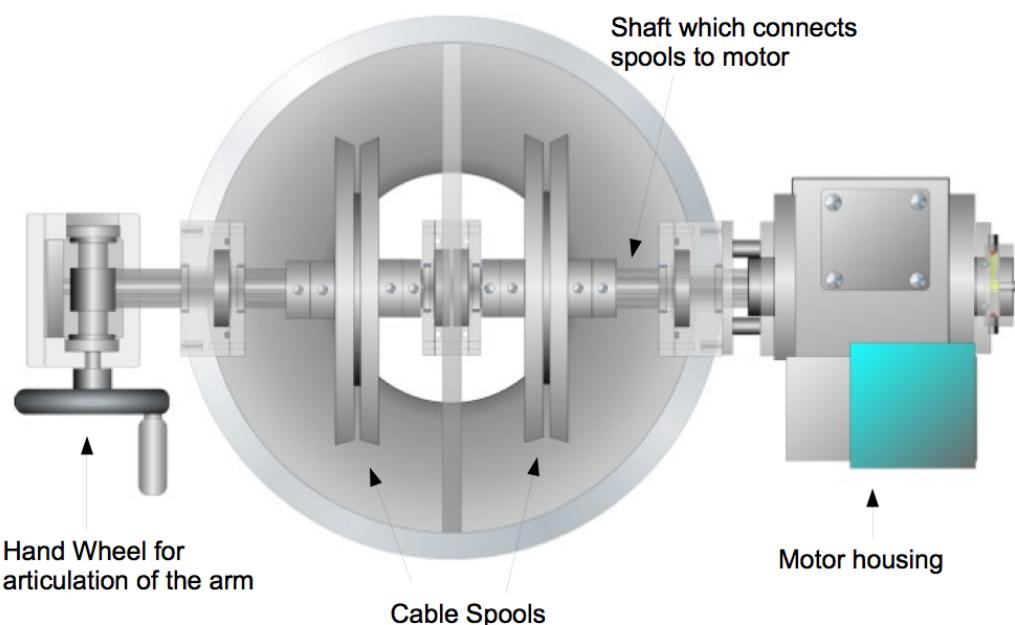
Looking down on the top of CALIS III and inside the upper assembly: the components and drive mechanism are shown. The hand wheel is on the left connected to one of the spools only. The next parts going from left to right are the two cable spools and then the sealed motor housing.
